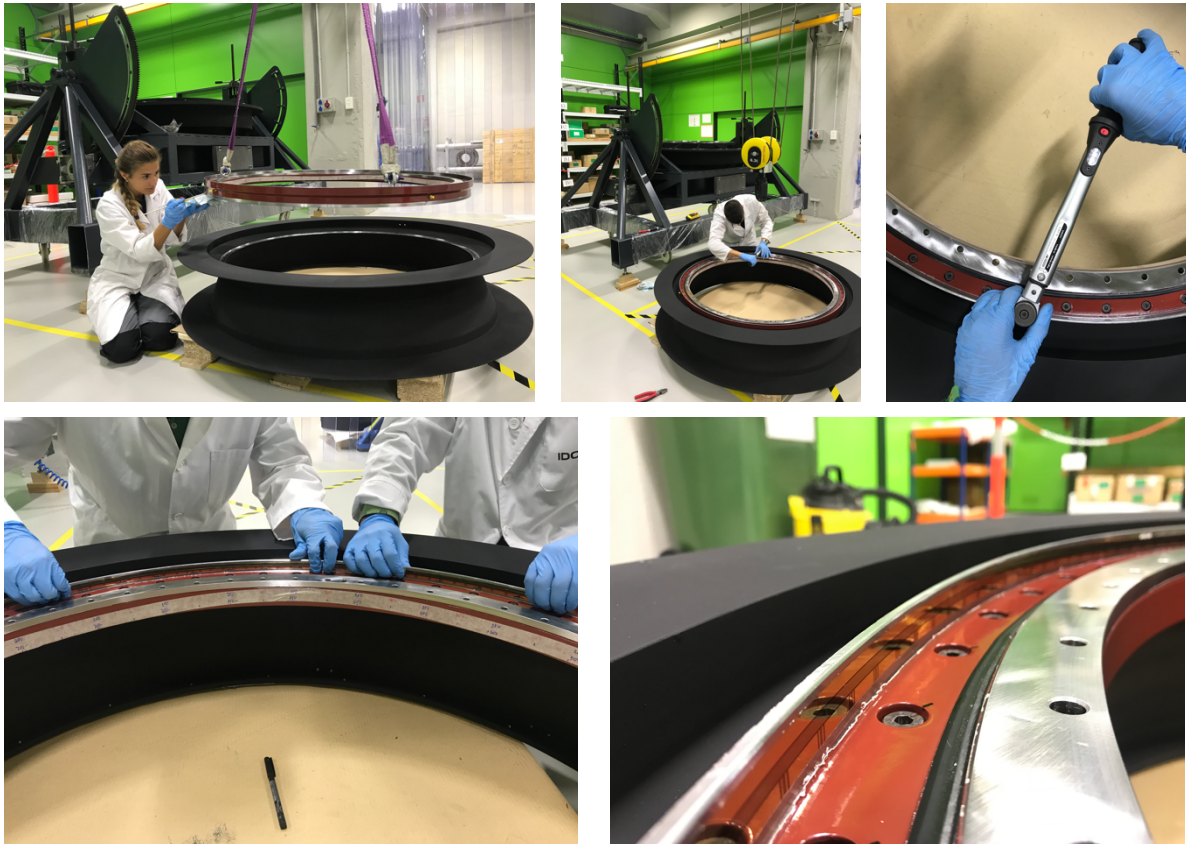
a) Bearing assembly, b) Encoder tape assembly on the bearing
